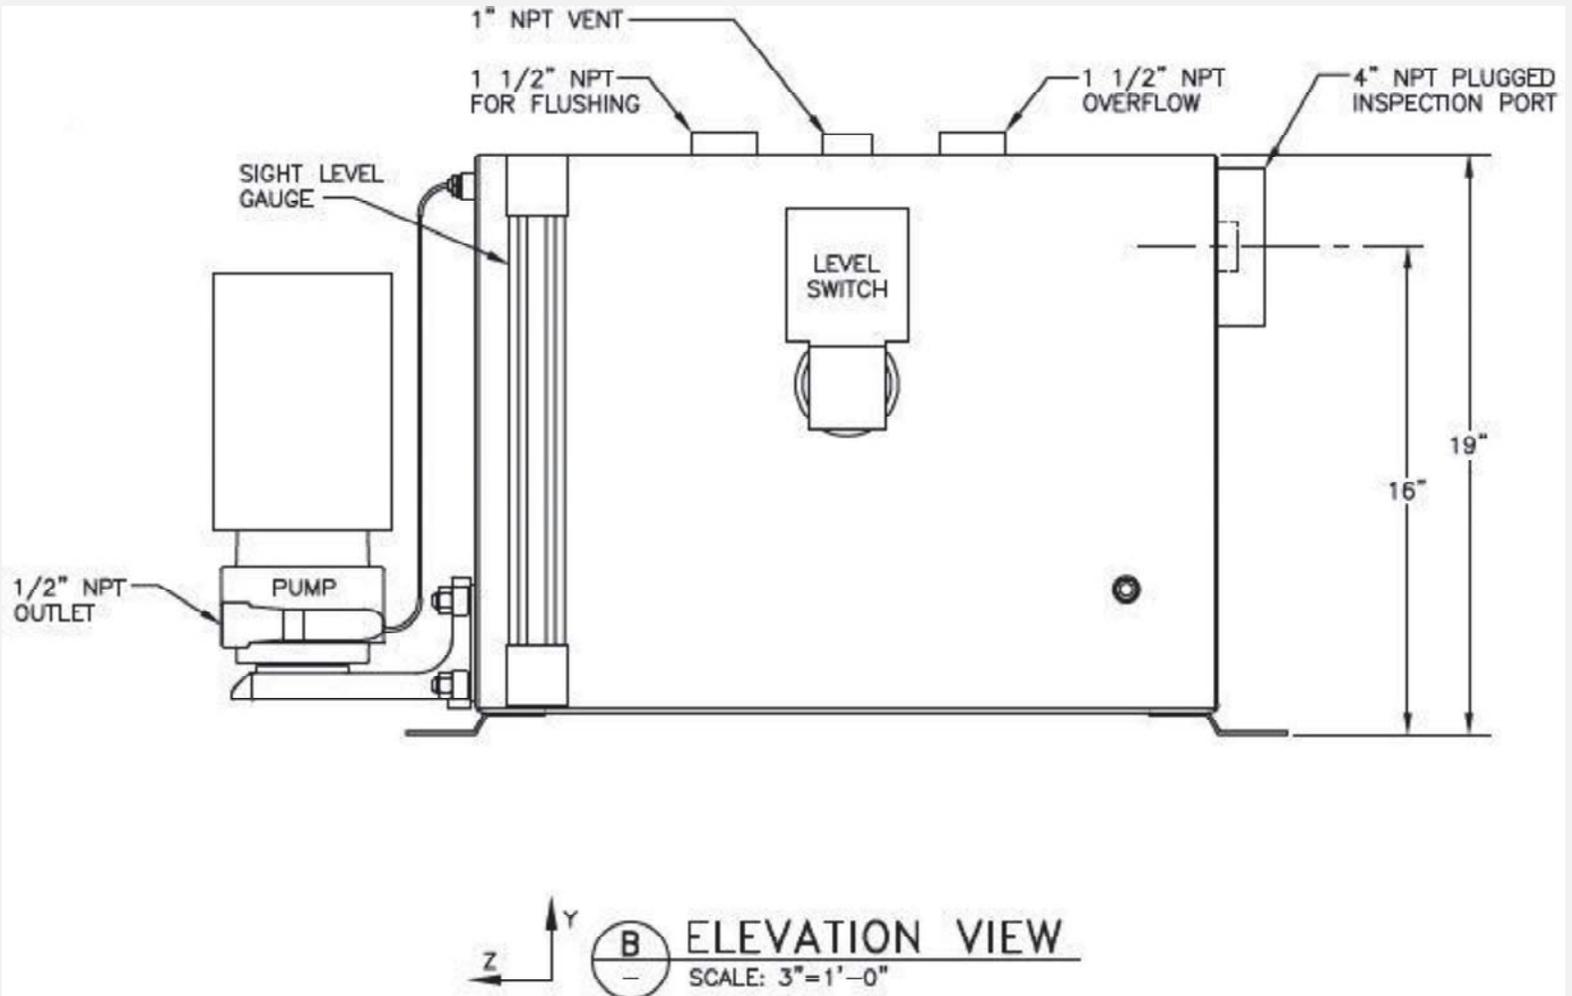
Elevation View "B" of New Sump Tank 59A-TK-3 (Drawing H-9-6113, Sheet 1)
